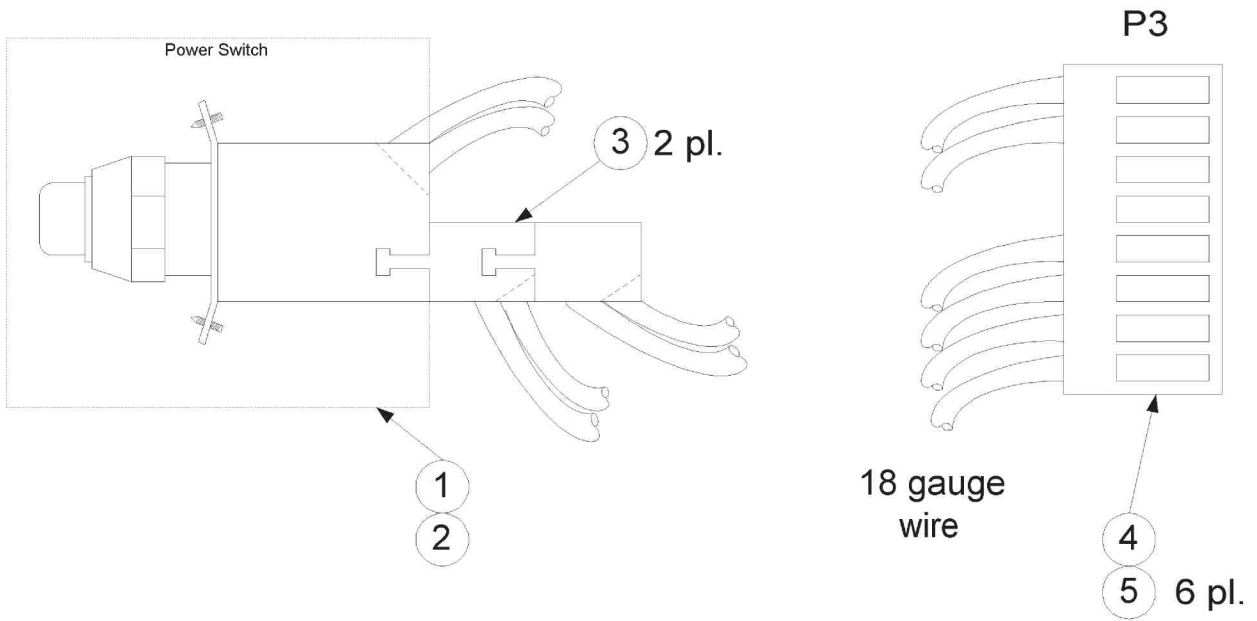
POWER SWITCH ASSEMBLY EXPLODED VIEW
